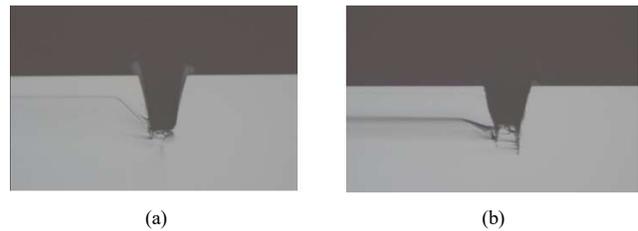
Innovative cleaning to remove the laser grooving induced edge burrs and Si dust: a) before and b) post cleaning.
